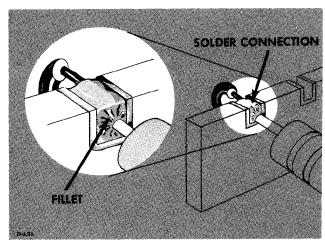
A slight fillet of solder is formed around the wire when heat is applied correctly.
